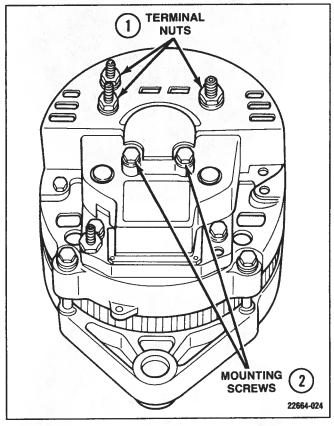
Removing Terminal Nuts And Back Cover Screws
